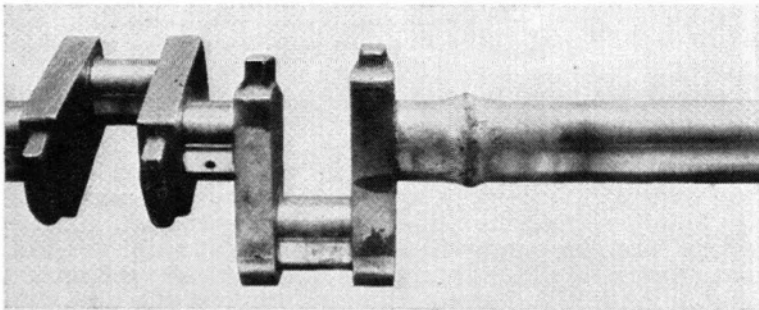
REPAIRED SHAFT BEFORE MACHINING
